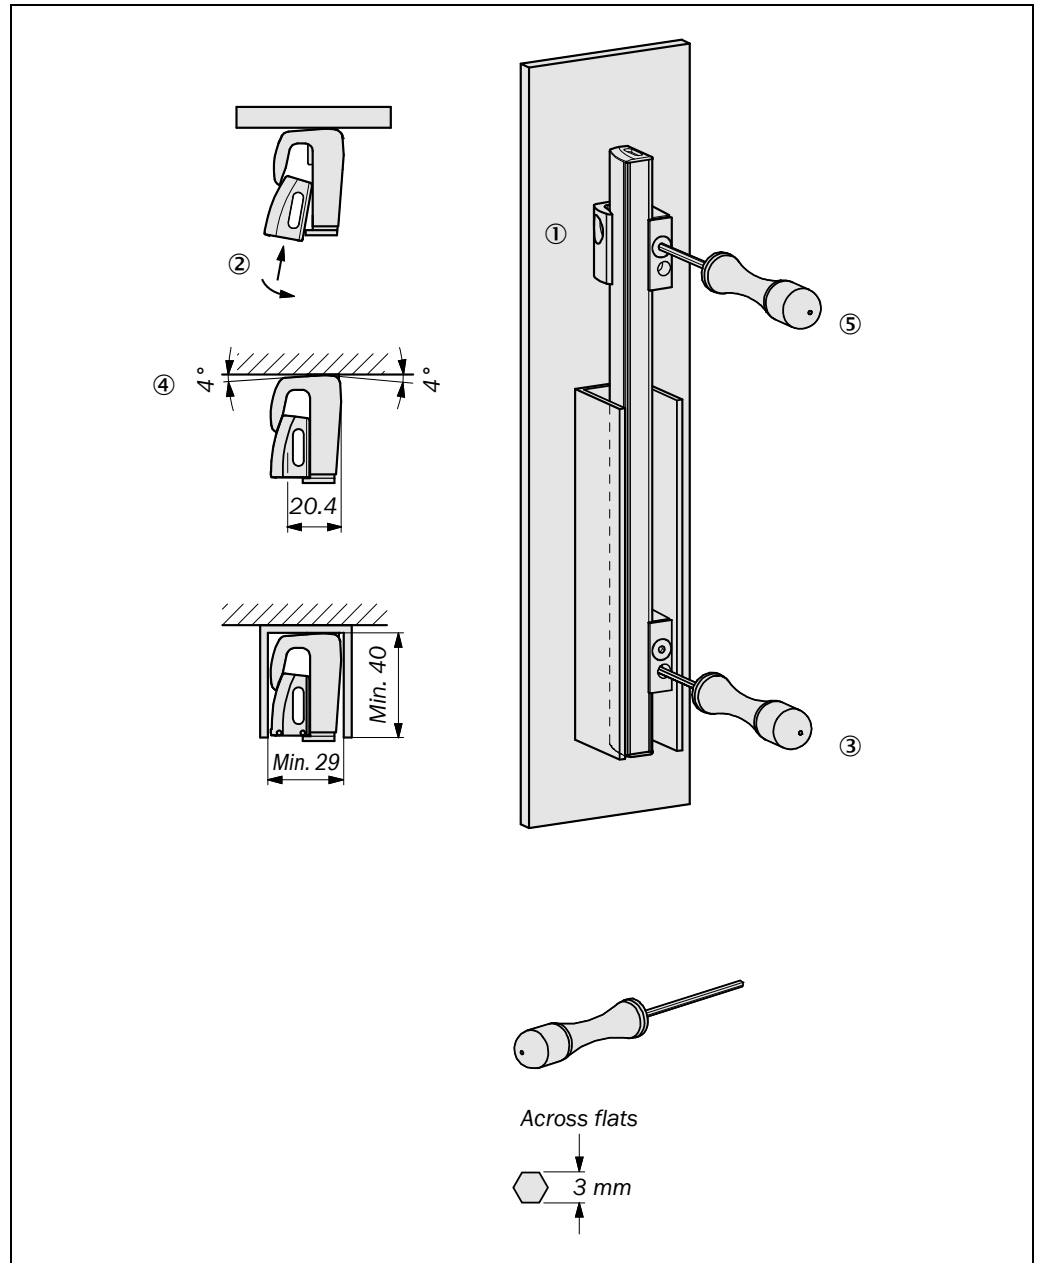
Mounting using C-Fix-Flex bracket, protective field perpendicular to the mounting surface
